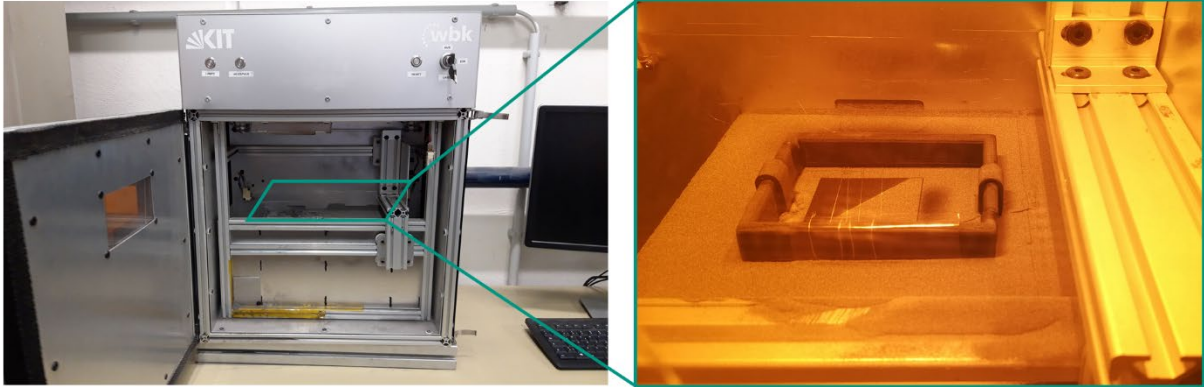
Sintratec Kit desktop SLS printer used for test series (left side) and view of build chamber during print of second test series after insertion of the frame (right side)
